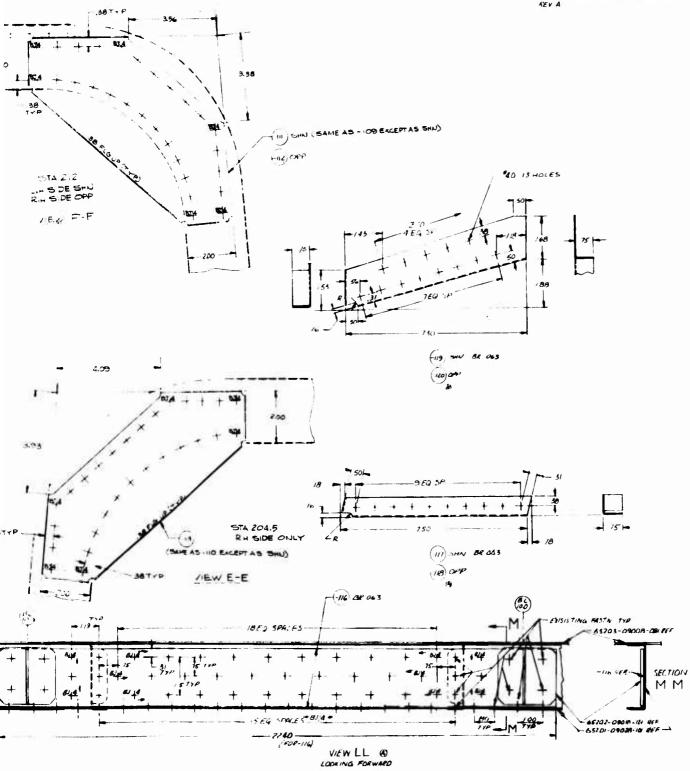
Redesigned Main Rotor Pylon Hinged Cover. (Drawing 38008-20001, Sheet 2).
